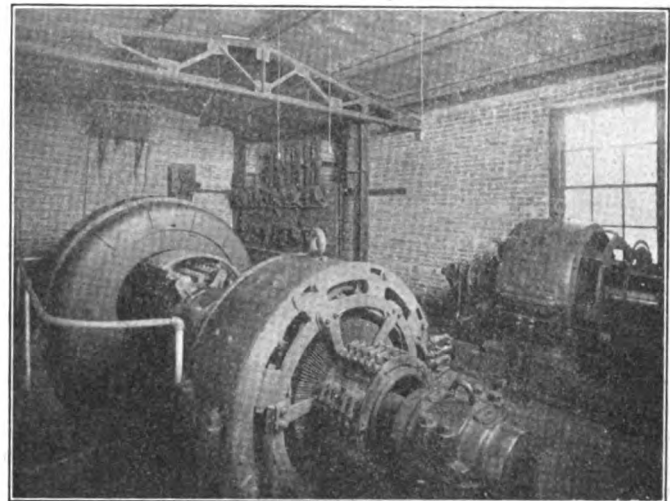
14-in. mill motor room, showing 1,000-hp. adjustable speed set and control.
